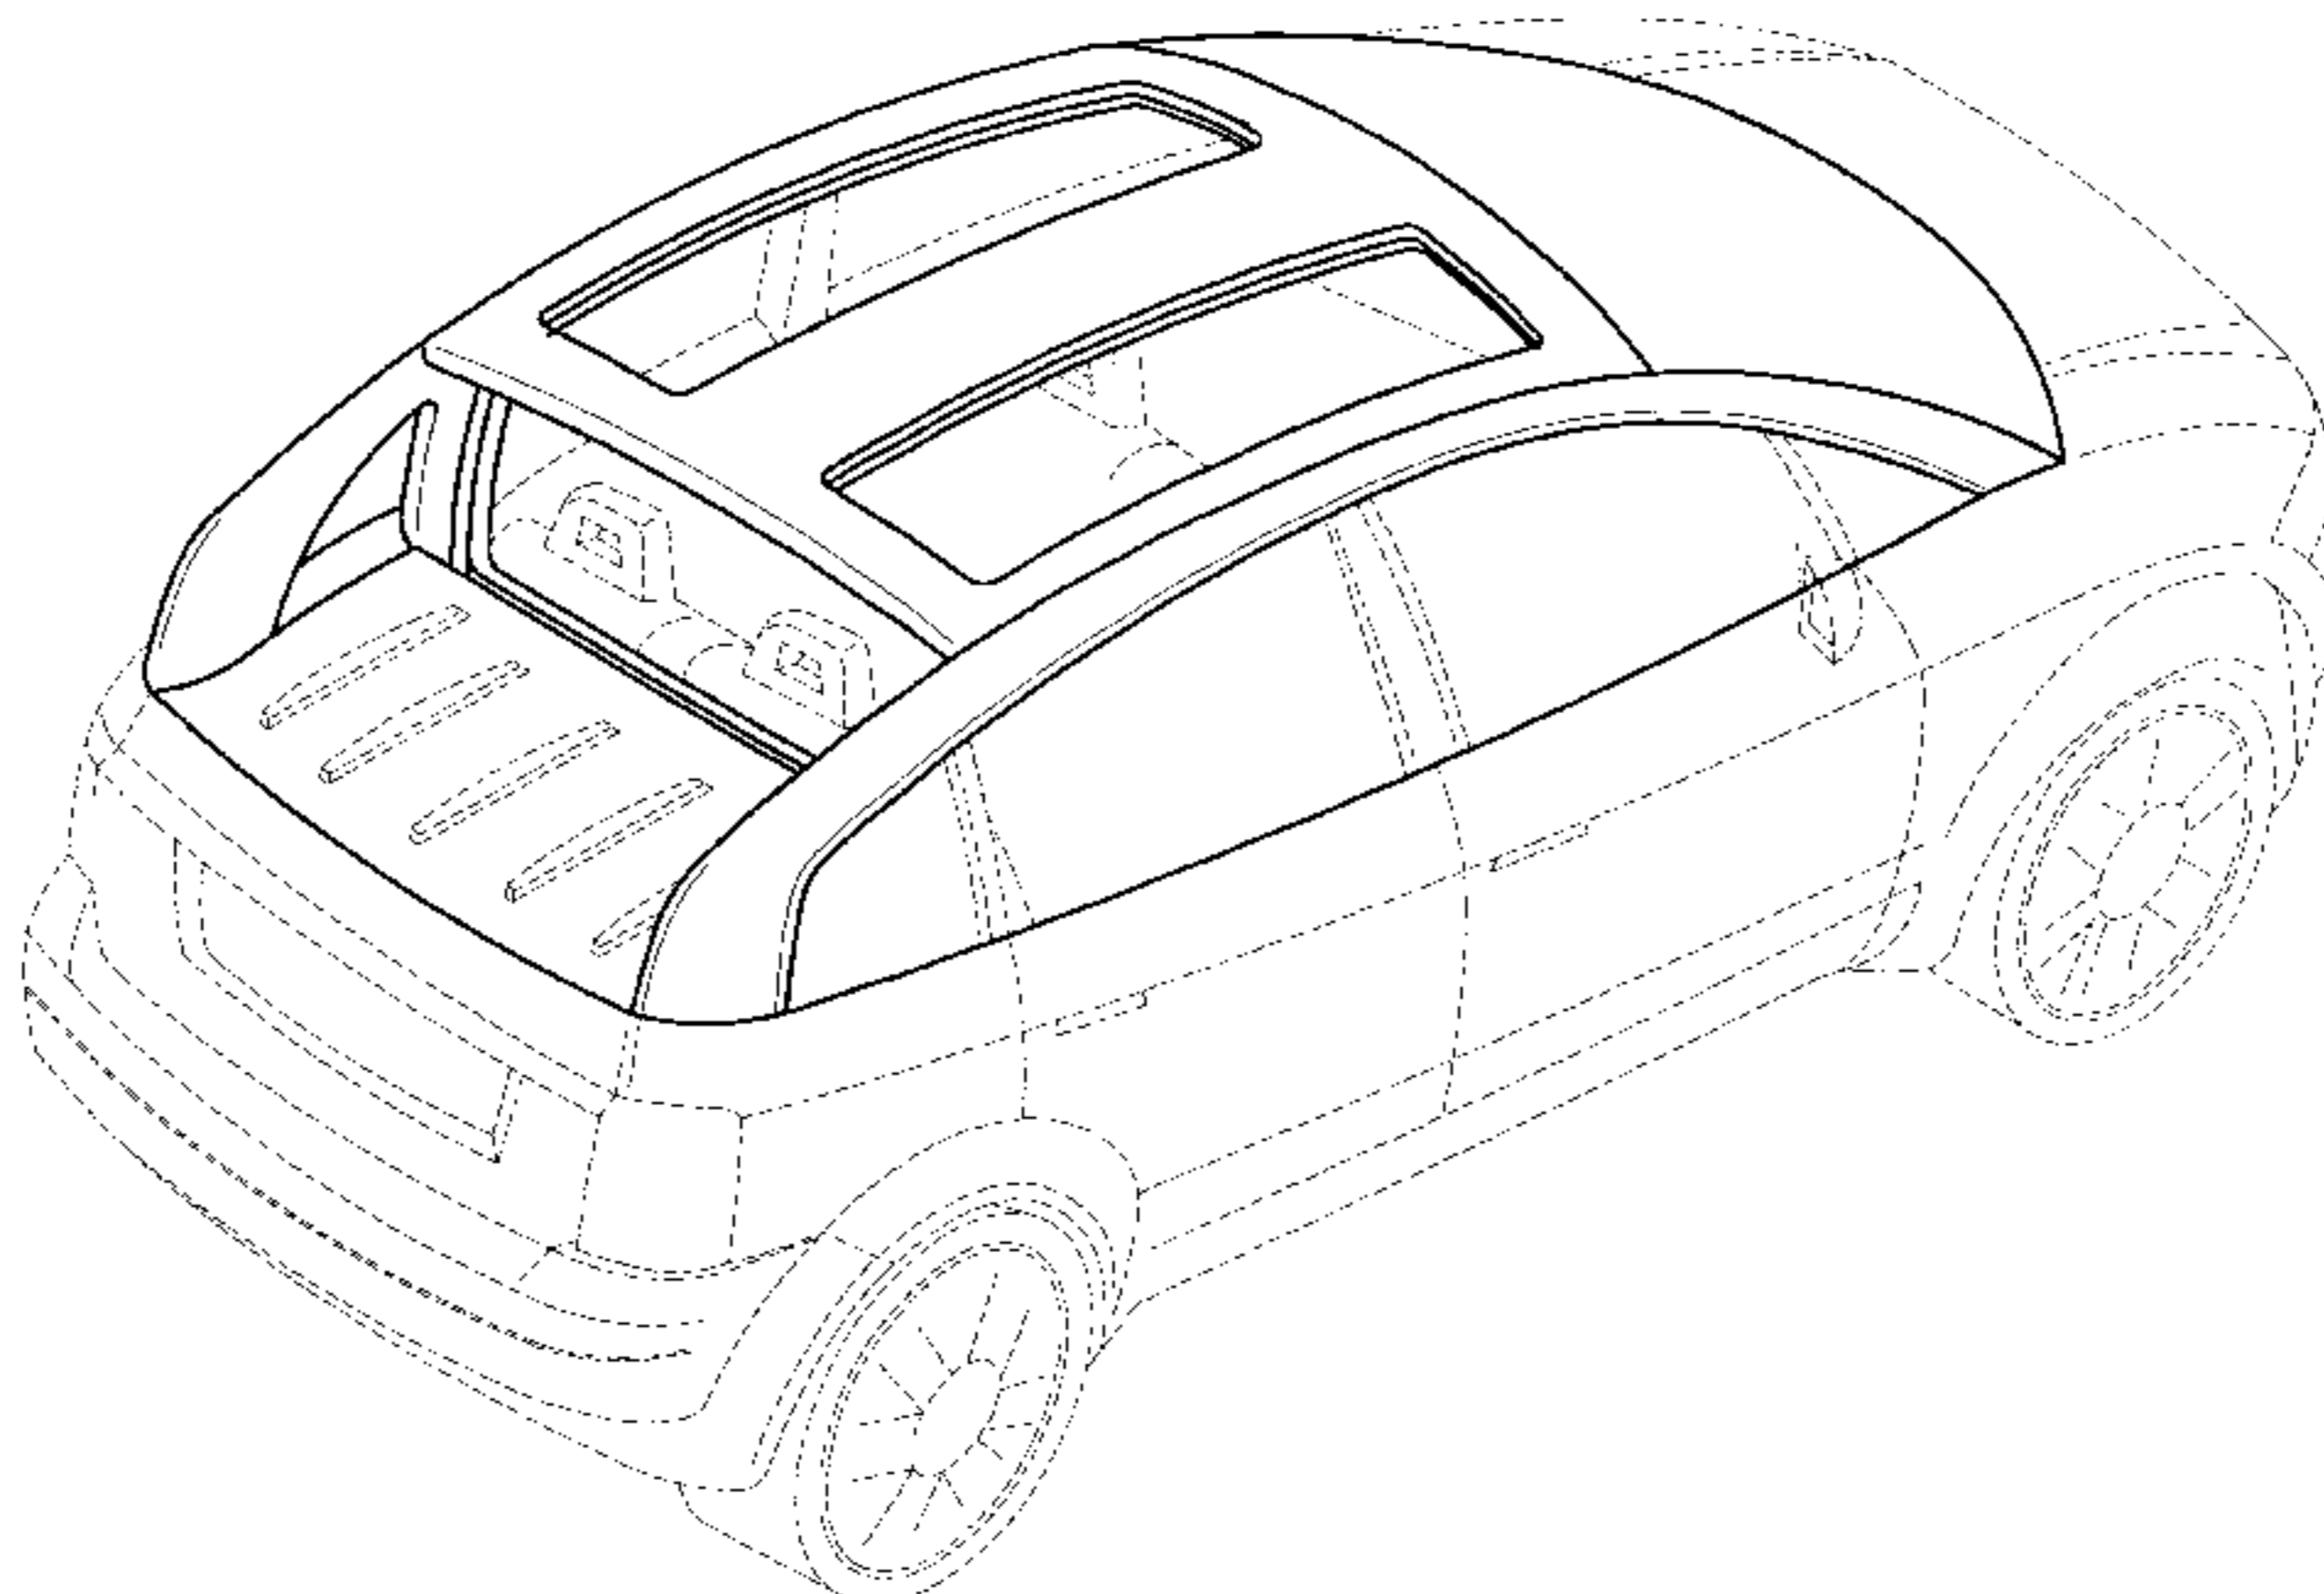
is a top elevational view of the roof showing the new design in a closed configuration;
